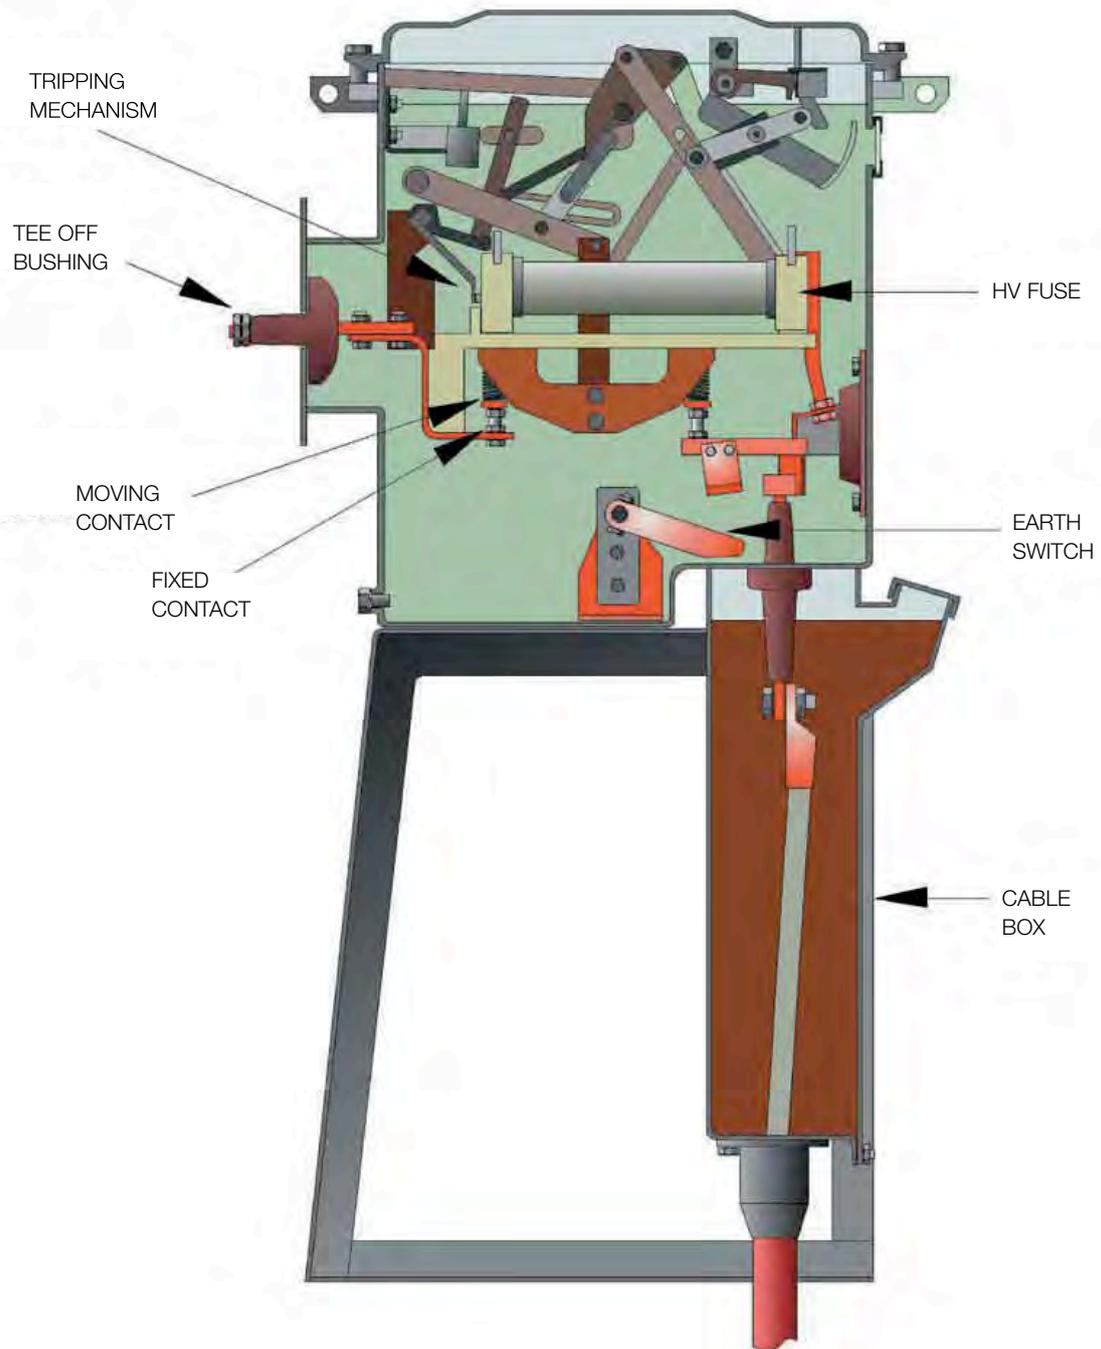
Typical arrangement of an 11 kV oil fuse switch
